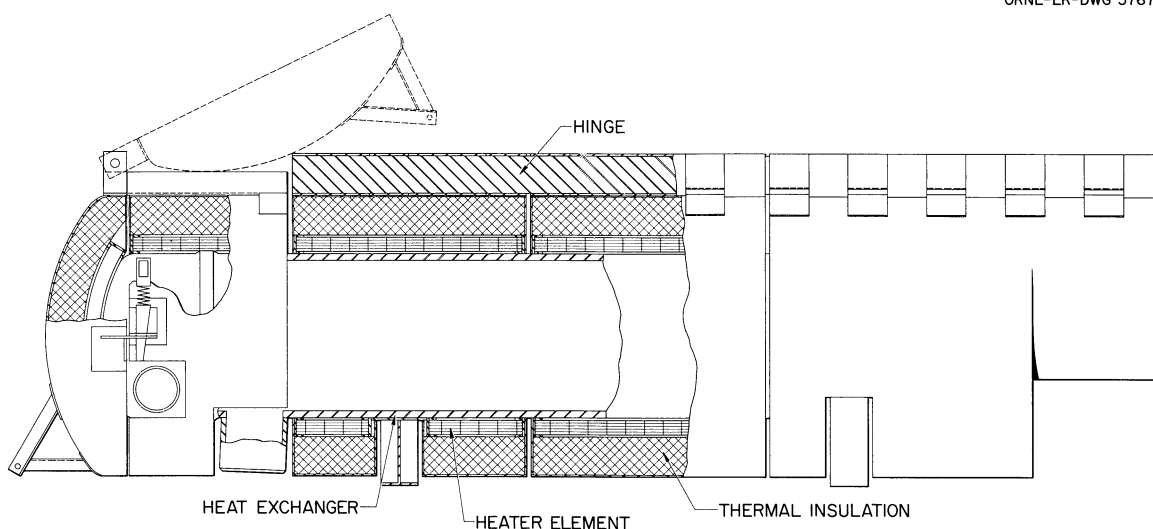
Heater Assembly for Primary Heat Exchanger.
